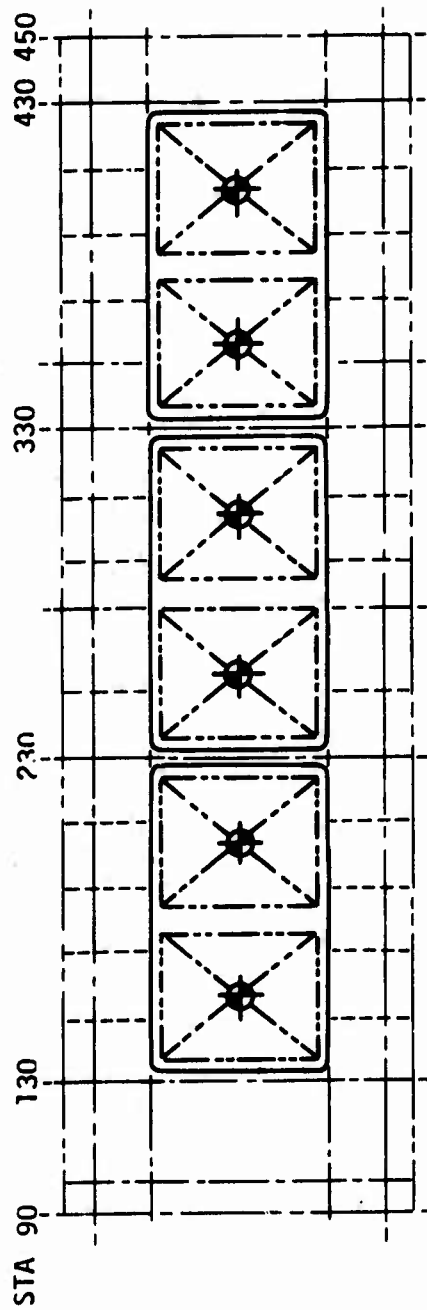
(U) Structural Arrangement for Single Row of Six 40 x 48 Cargo Pallet Exits.
